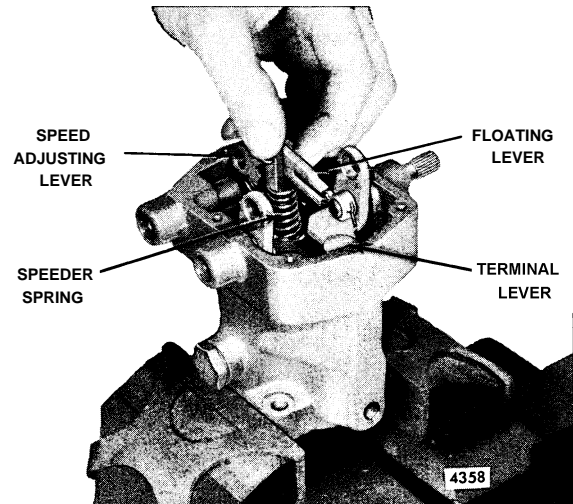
Removing or Installing Speed Adjusting Lever, Spring Fork, Speeder Spring and Pilot Valve Plunger Assembly
